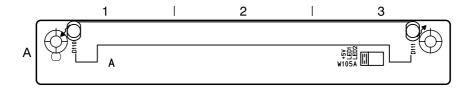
EU56 Front LED PC Broad (Top side)
